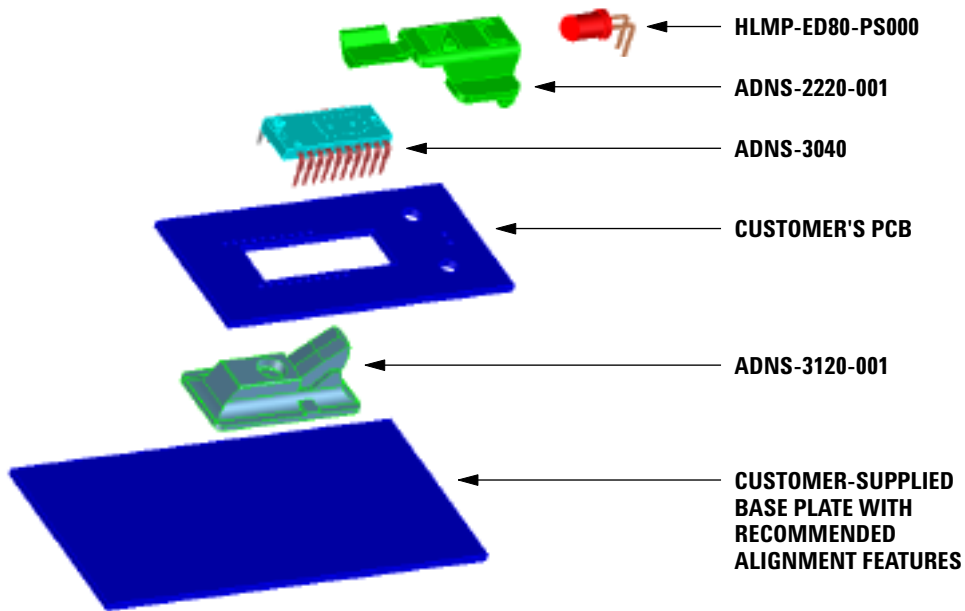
Exploded view drawing of optical tracking engine with ADNS-3040 optical mouse sensor
